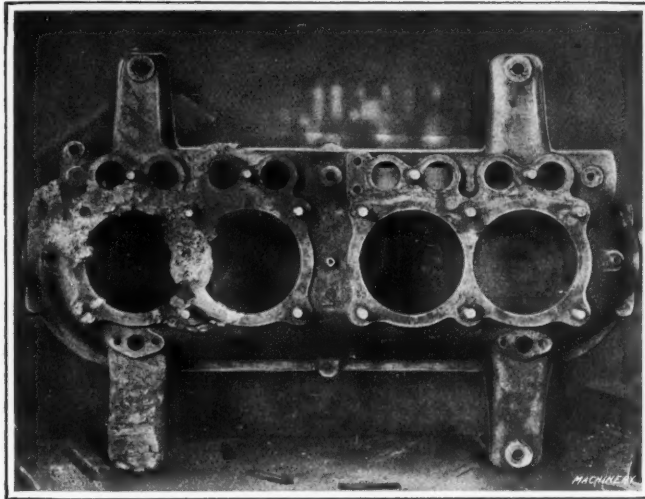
Crank-case damaged by the Use of Flux and Improper Welding
